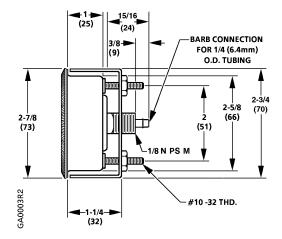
Dimensions of the 2-1/2 Inch Gauge.
